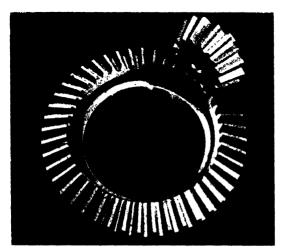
STRAIGHT-TOOTHED BEVEL GEARS (By courtery of Gleason Co.)
